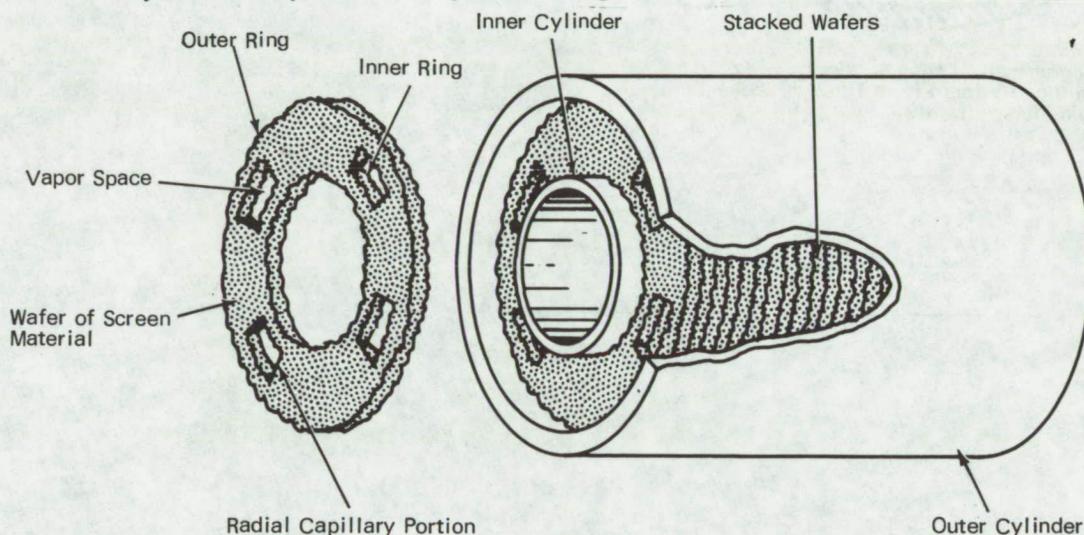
Radial Heat-Flux Transformer Partially Exploded
